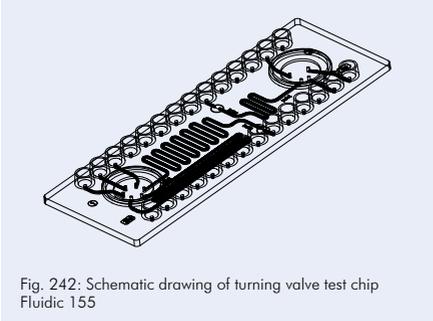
Schematic drawing of turning valve test chip Fluidic 155
